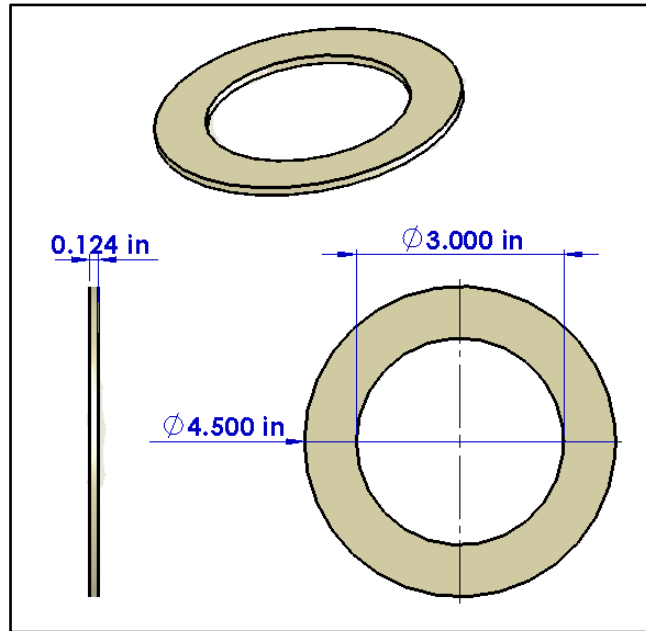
Piezoelectric Shaker Table Crystal Component Dimensions
